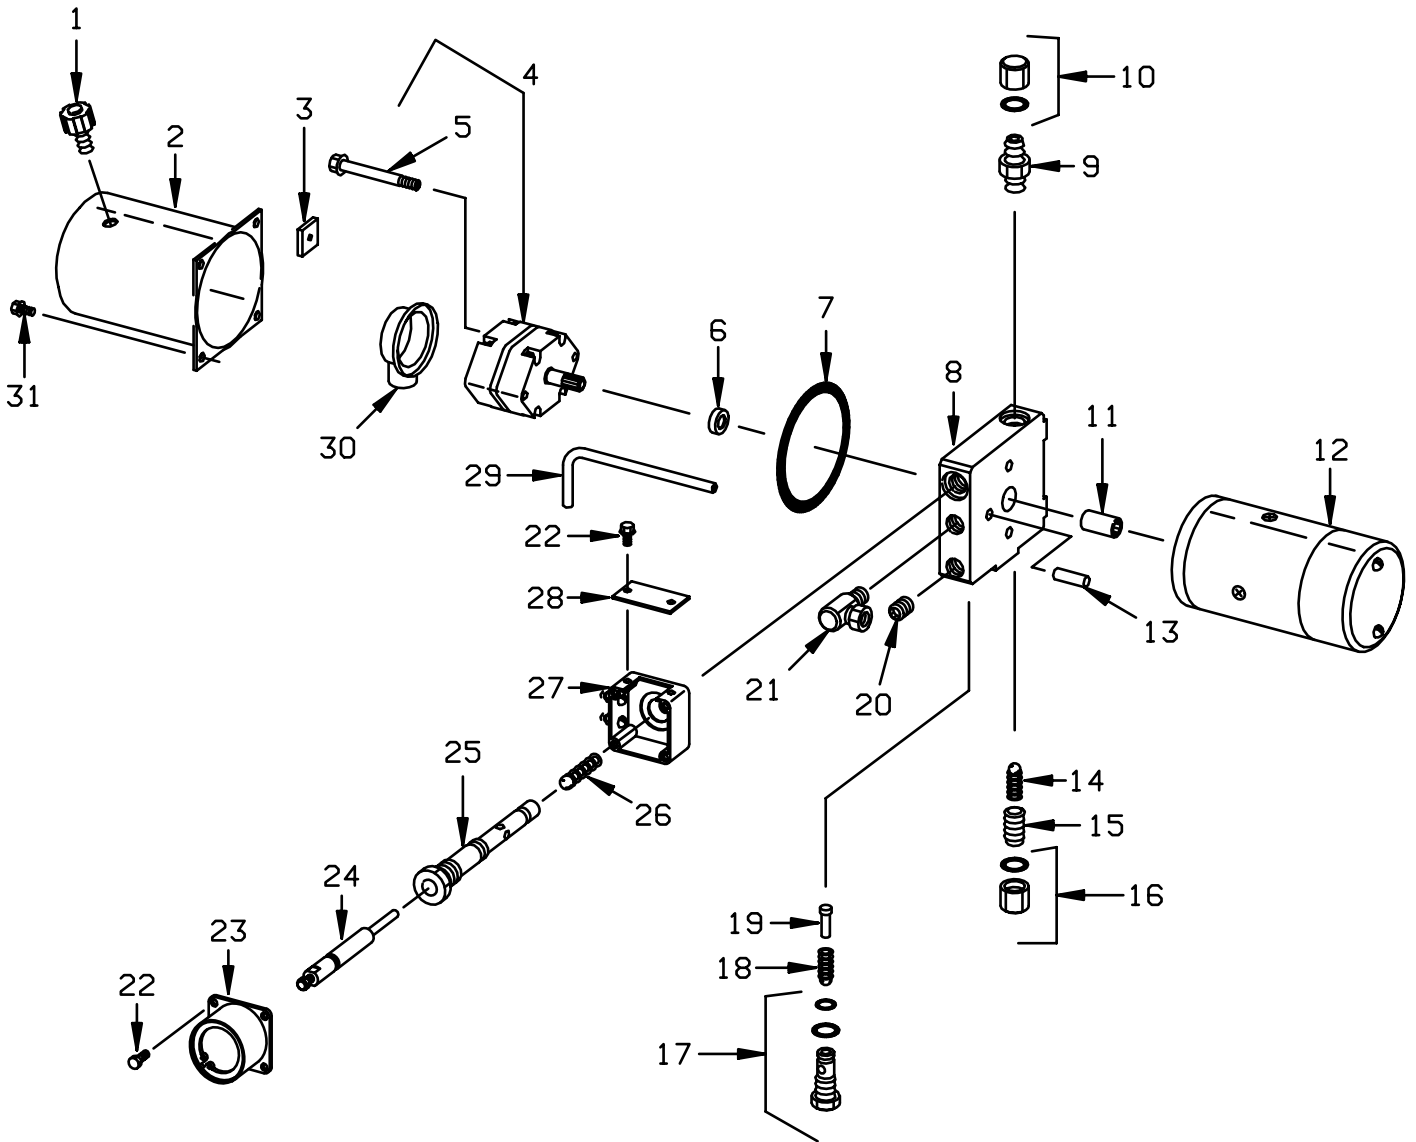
HYDRAULIC PUMP MOTOR ASSEMBLY (202333)
